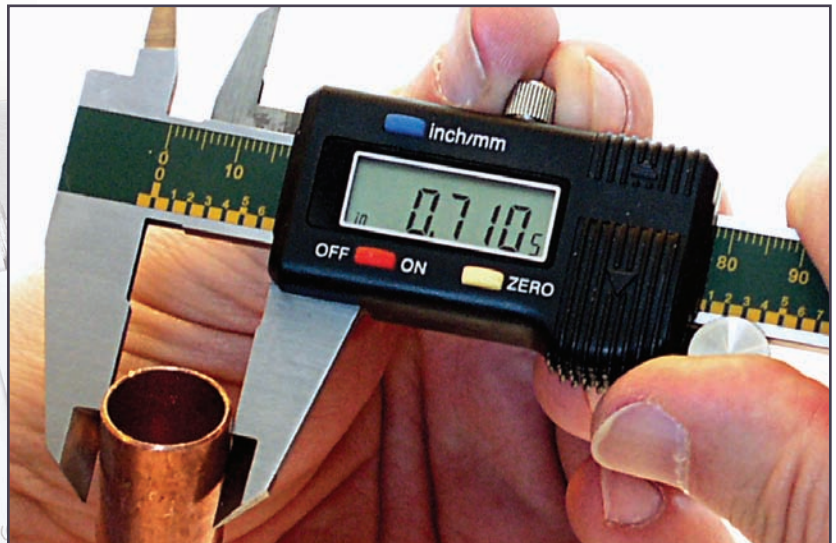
Once you have the component centered and the jaws in place, tighten the lock screw to hold your measurement steady.
